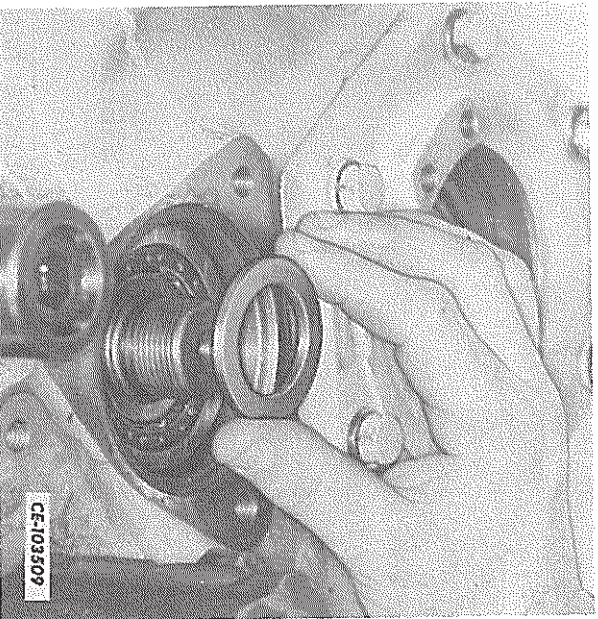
Installing the Spline Shaft Front Bearing Plate
